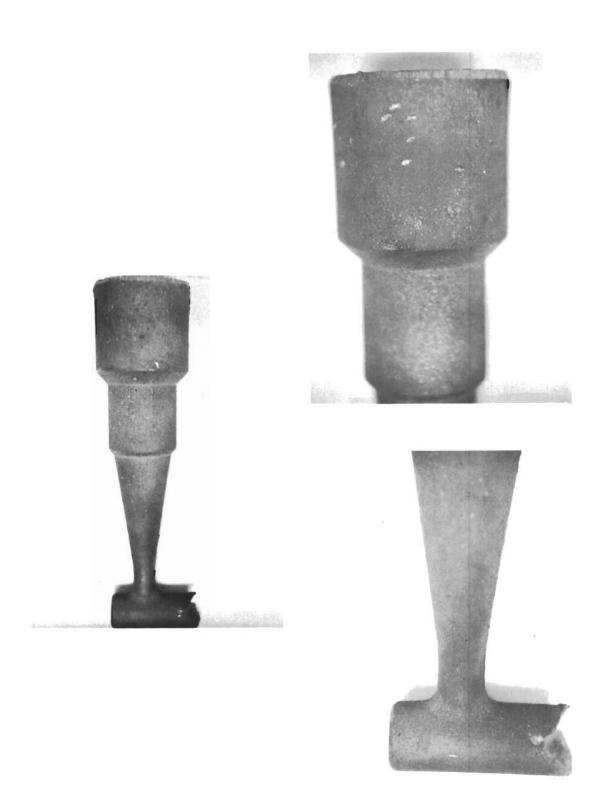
Casting from Zircon Shell Mold with Risers Attached
